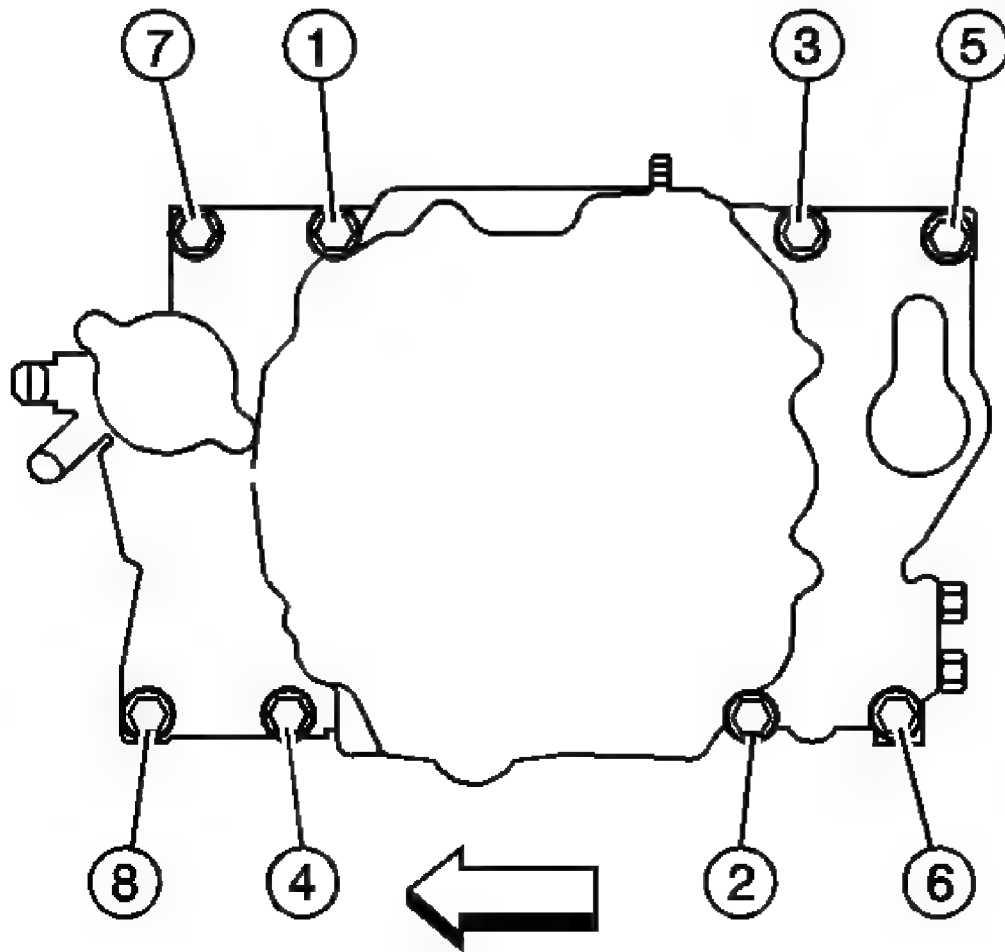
Identifying Lower Intake Manifold Fastener Tightening Sequence
